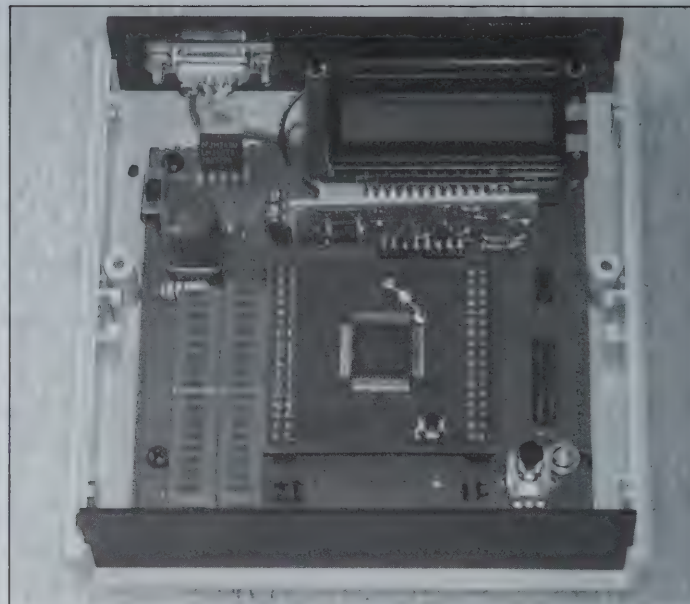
HC908 Test Fixture used to initially program and test all daughtercards produced.
